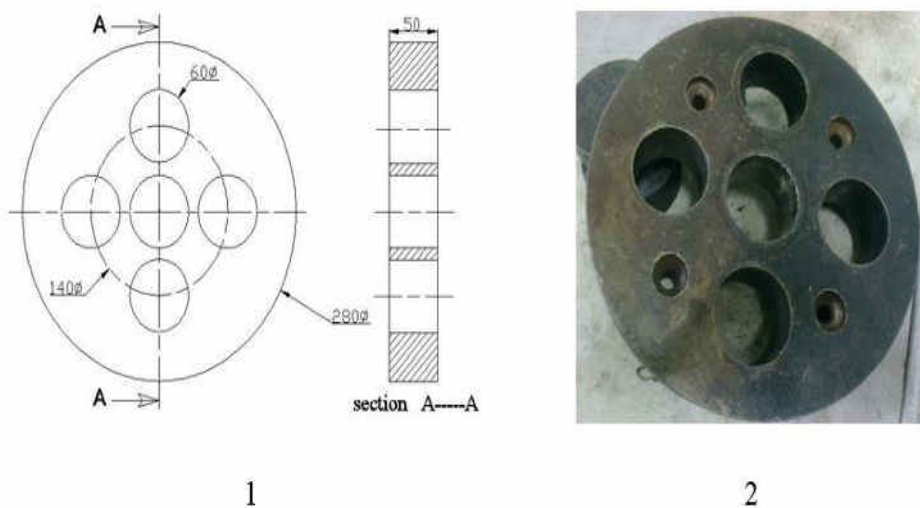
Mold holder: 1- main dimensions, 2- photograph.
